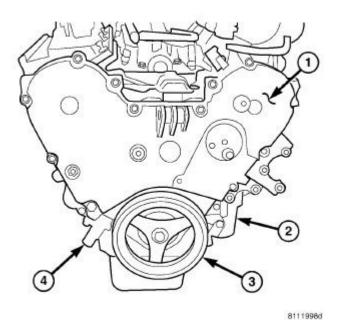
Front Timing Belt Cover, Engine Oil Filter, Vibration Damper & Timing Belt Tensioner Courtesy of CHRYSLER LLC
